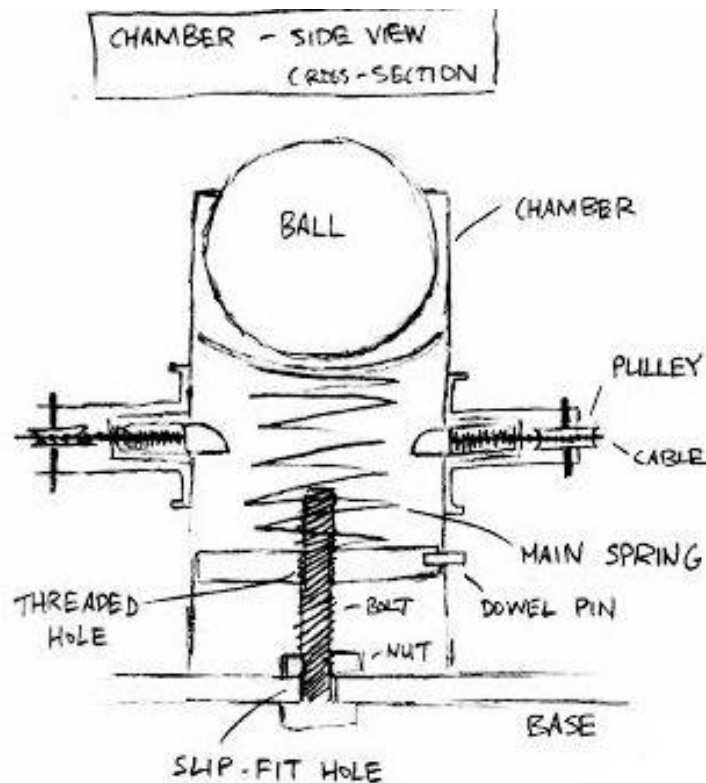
The cross sectional view of the spring chamber is shown. As you can see, the spring is housed inside a cylinder and has a bottom threaded plate and a cup-shaped plate attached to the top to hold the ball. When the spring is compressed, the spring triggers automatically compress and lock the spring in place. Each spring trigger is attached to a cable which is ran around a pulley and back to the lever arm (not shown). Adjustability of the spring's compressed length is controlled by turning the bolt at the bottom of the base.
